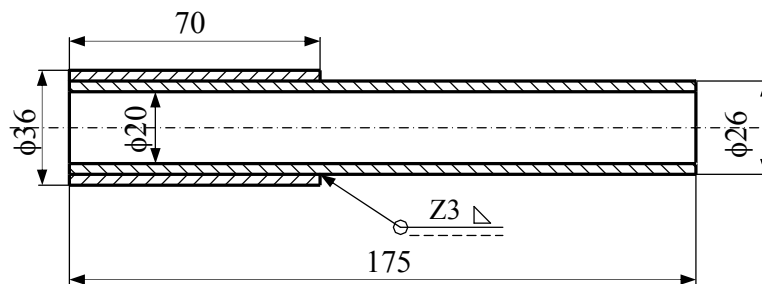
Aluminium welded joints tested by Costa et al. [21].
